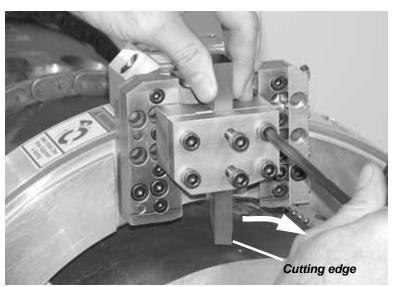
Insert the bevel tool in the holder with the cutting edge in the direction of rotation.
